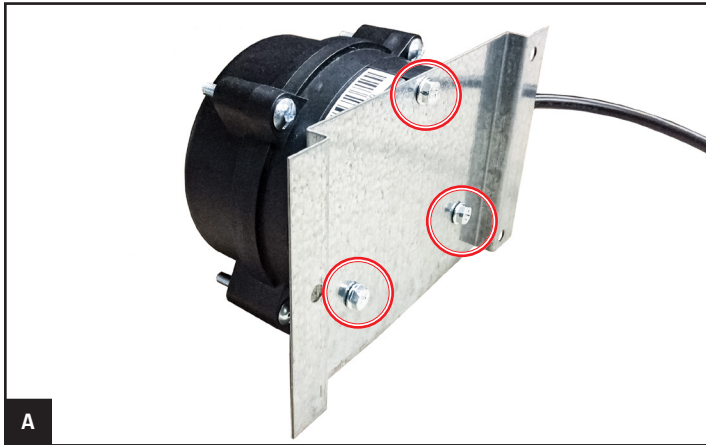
The rear-mounting bracket installed on the fan motor without the spacer.
